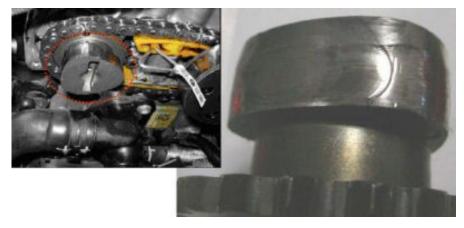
Excessive wear on the lobe for high pressure fuel pump in the intake camshaft.
